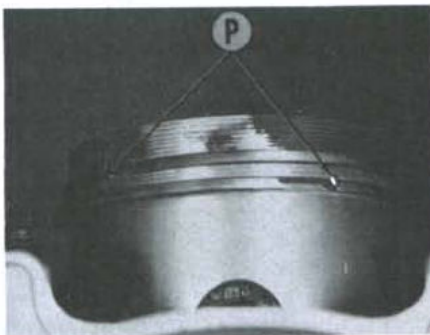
Pins (P) in ring grooves prevent rotation of ring ends into cylinder ports and consequent ring breakage. Piston is installed with pins (P) toward flywheel end of crankshaft.
